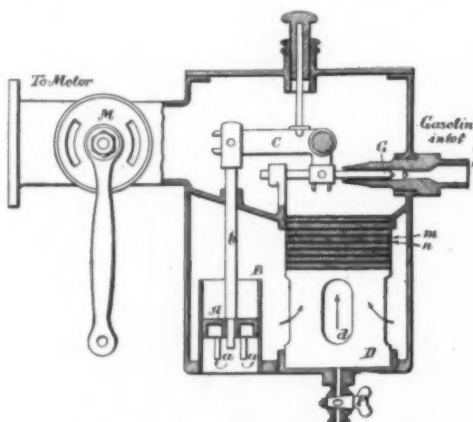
WICK CARBURETER WITH MECHANICAL FEED.
